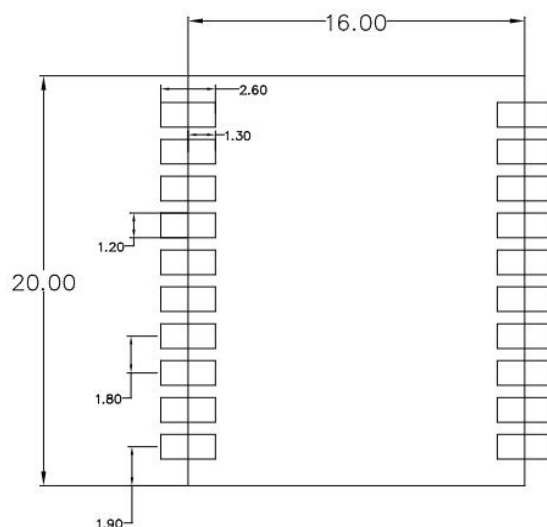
Recommended PCB Footprint Dimensions (Unit: mm)
